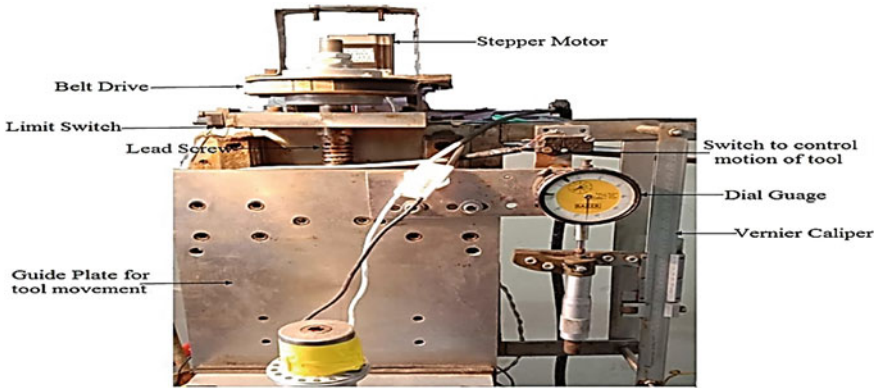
Photograph of components of Tool Feed arrangement [6]
